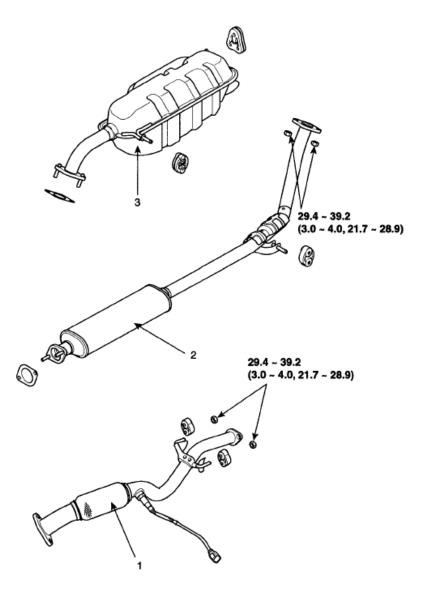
Identifying Exhaust Manifold & Catalytic Converter Assembly Courtesy of HYUNDAI MOTOR CO.
